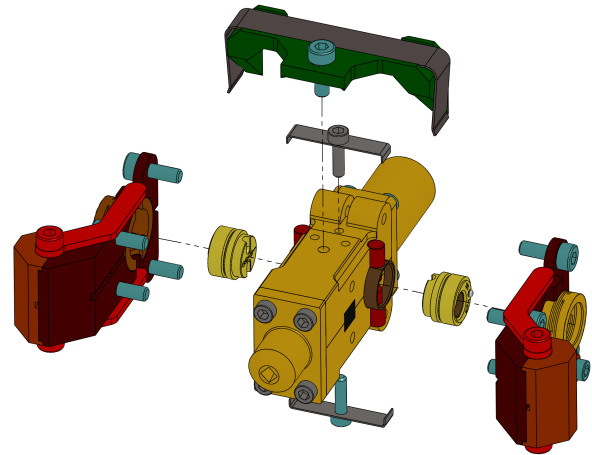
Exploded view of the new 2SB mixer, showing the way it is disassembled to replace the mixer backpieces.
